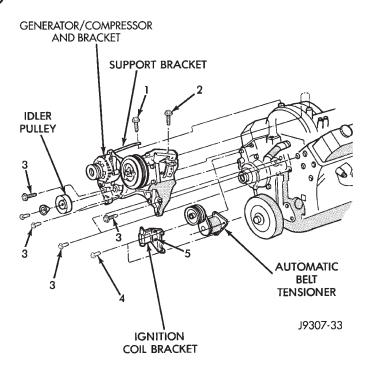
Generator and A/C Compressor Mounting Bracket—5.2L Engine
